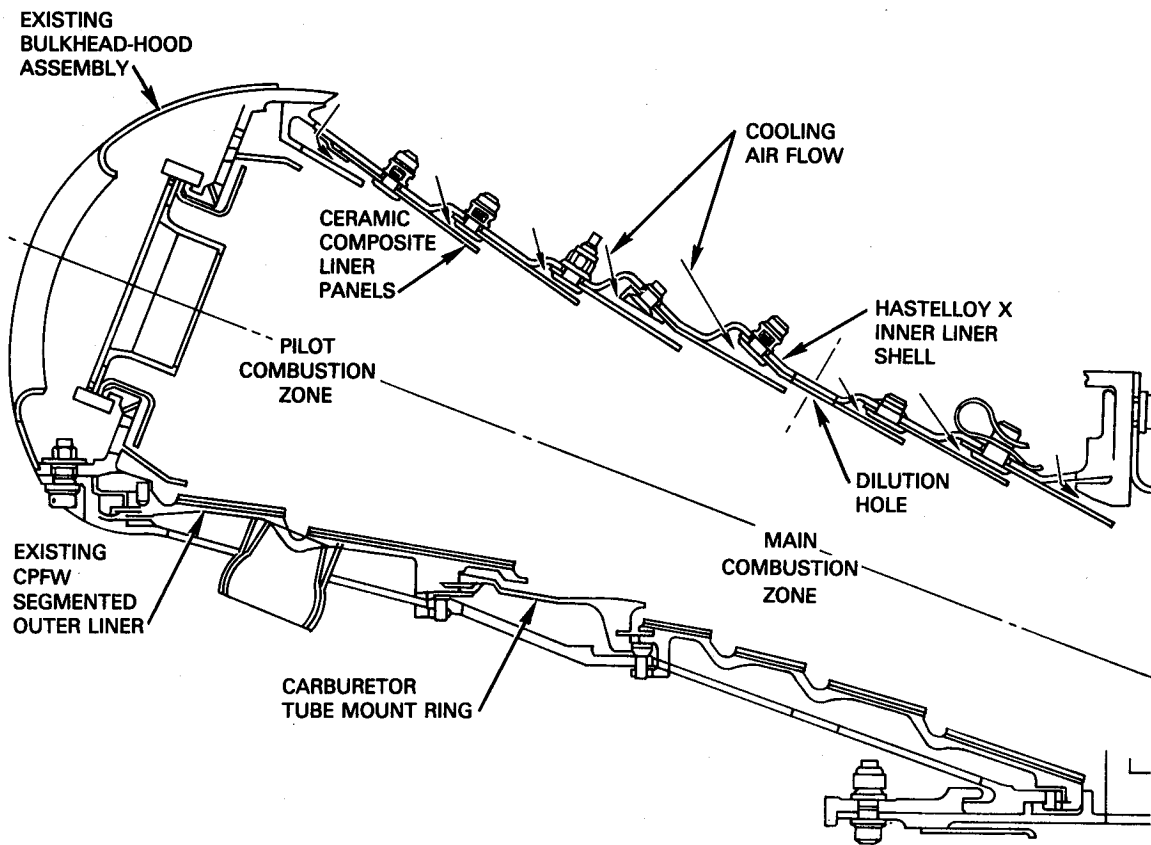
Cross Section of the Sector Combustor Rig with Ceramic Composite Inner Liner
